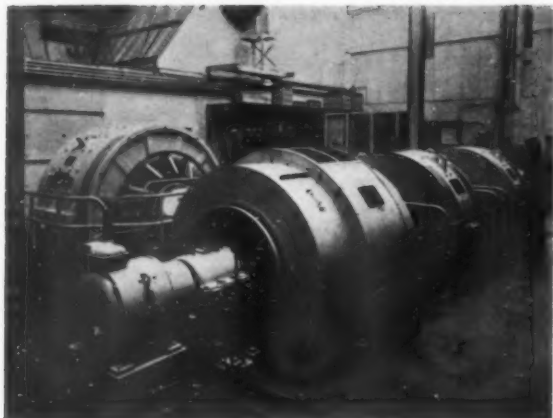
Main drive motor and motor generator set for No. 1 hot mill.
